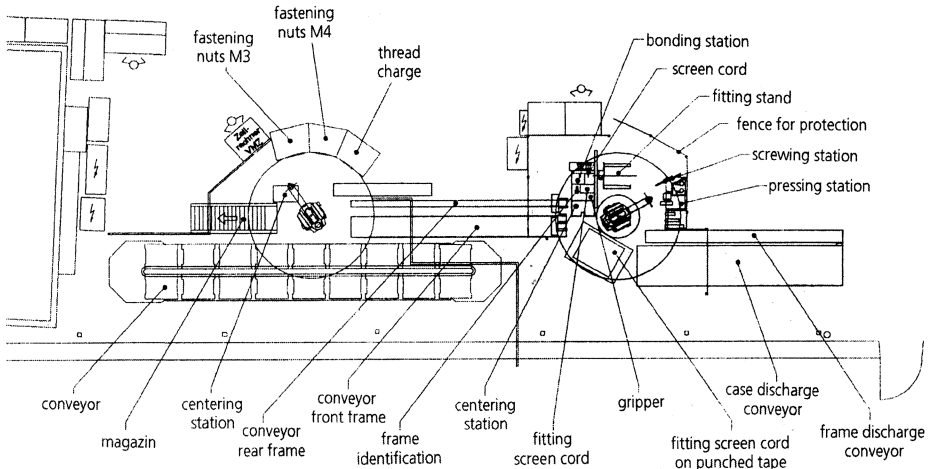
Layout of the preassembly (left) and final assembly cell (right).
